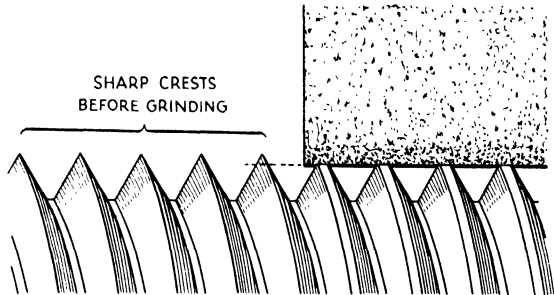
USING FLAT-FACED WHEEL FOR GRINDING CRESTS OF AMERICAN TYPE OF THREAD
